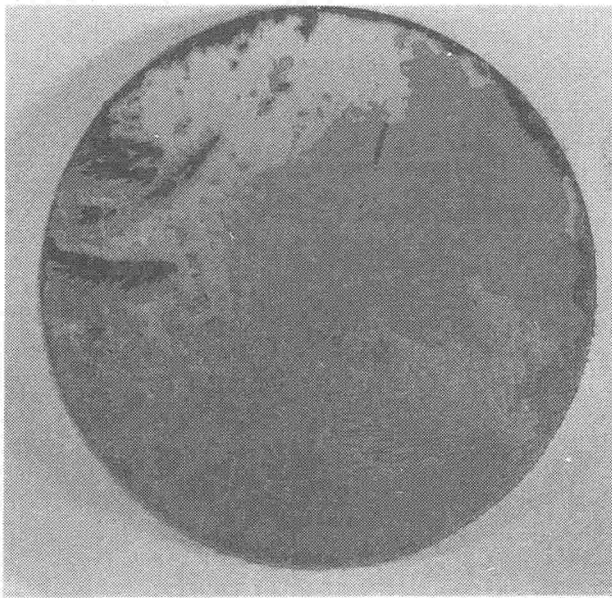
Fracture surface of steel-steel adhesive joint after torsion test. (d=28mm)
